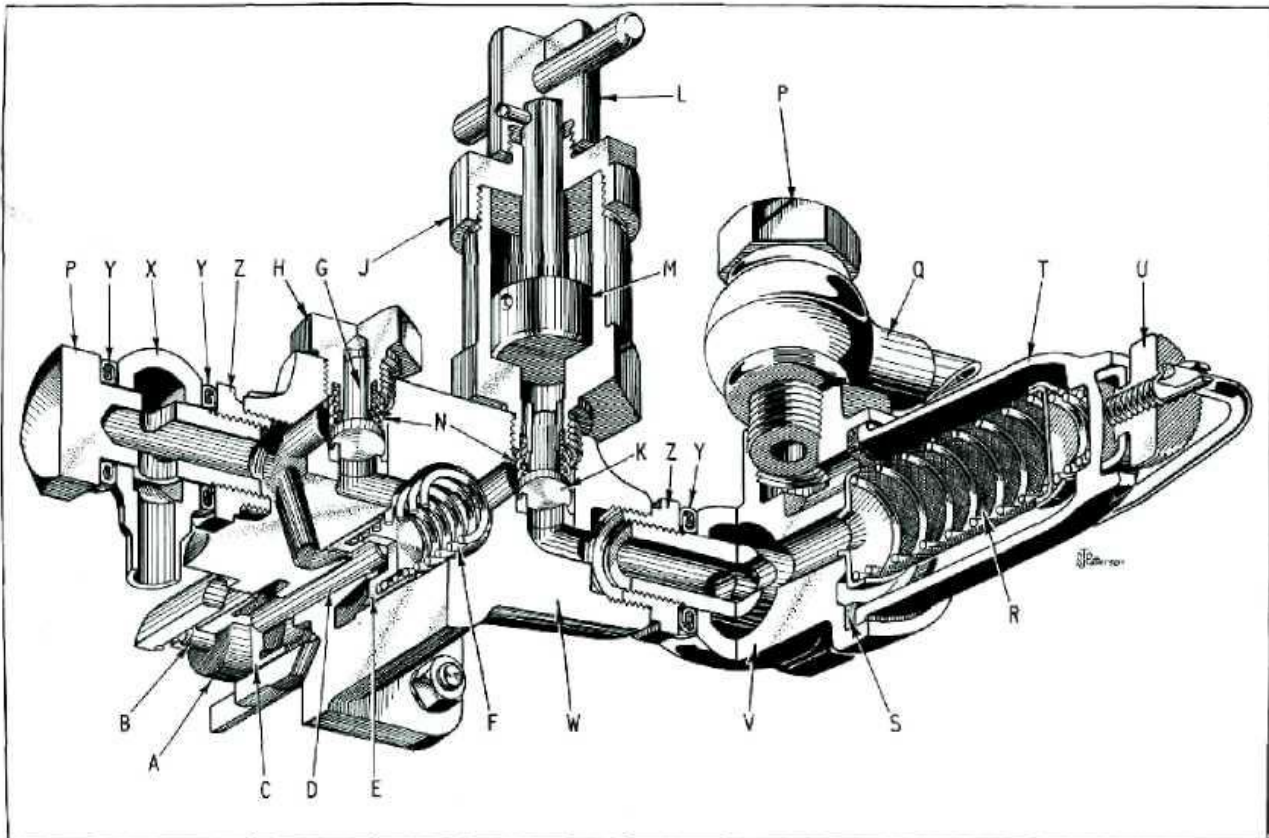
Sectional View of Fuel Feed Pump and Pre-filter.
